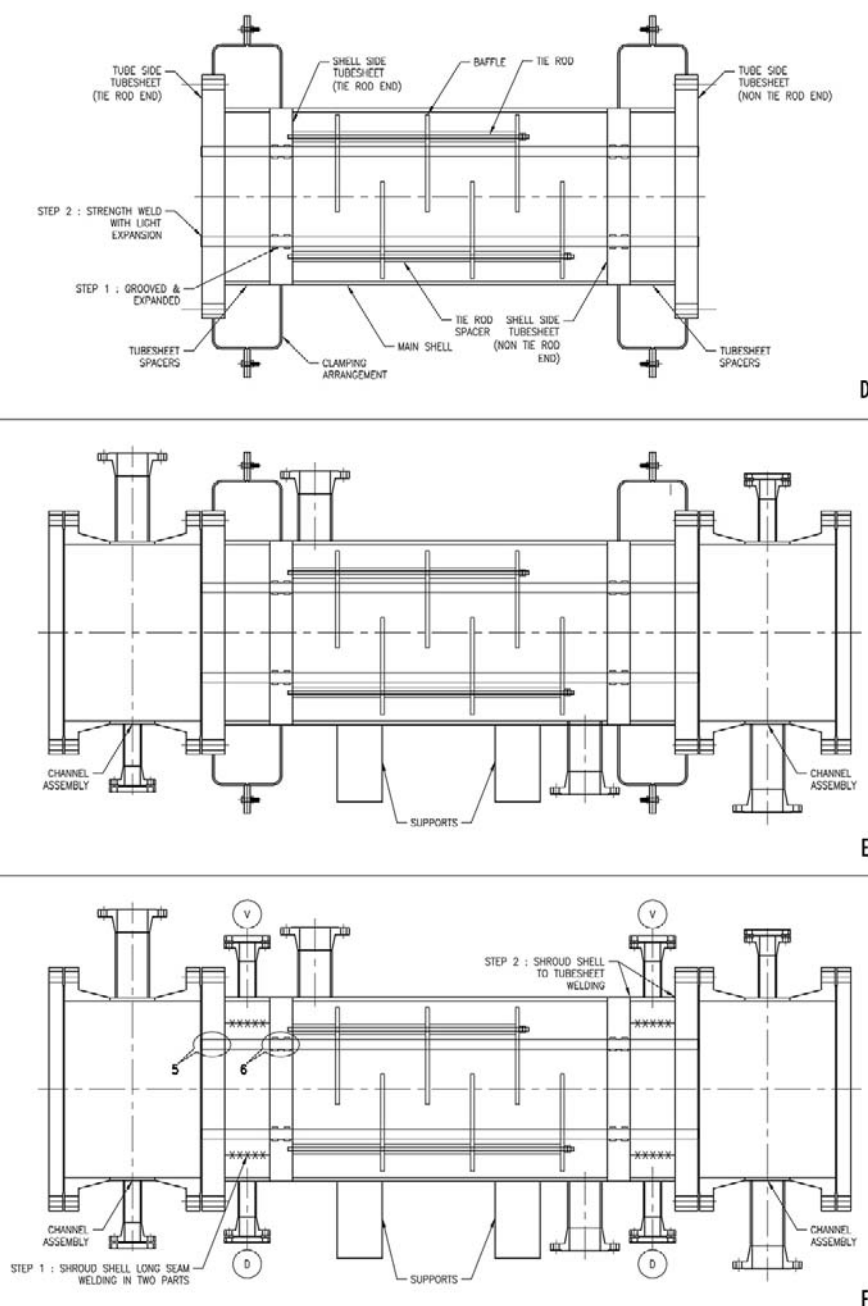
(D-F) A fabrication and assembly sequence (A-F) has been presented for a fixed double-tubesheet heat exchanger.
